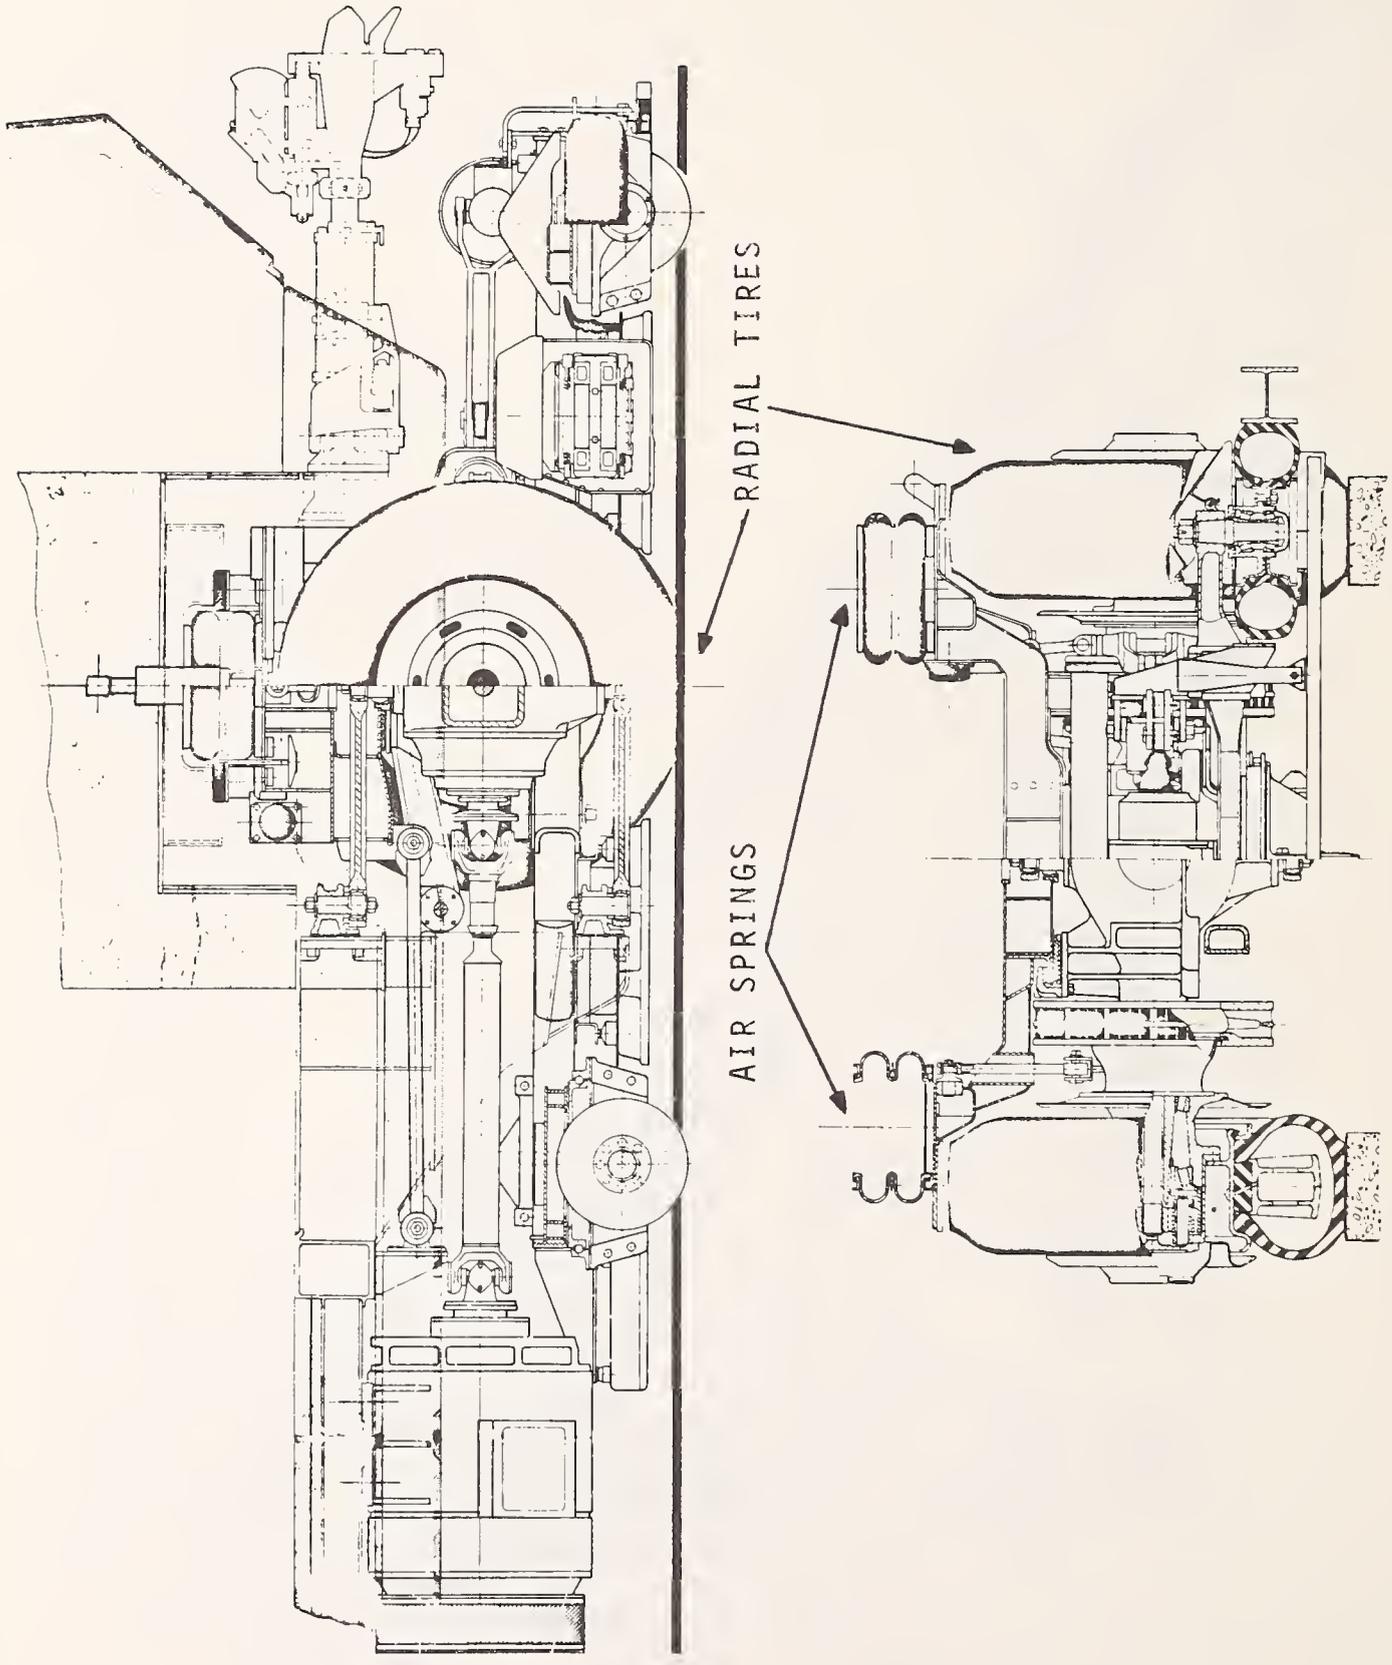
RUNNING GEAR ASSEMBLY SHOWING AIR SUSPENSION SYSTEM
